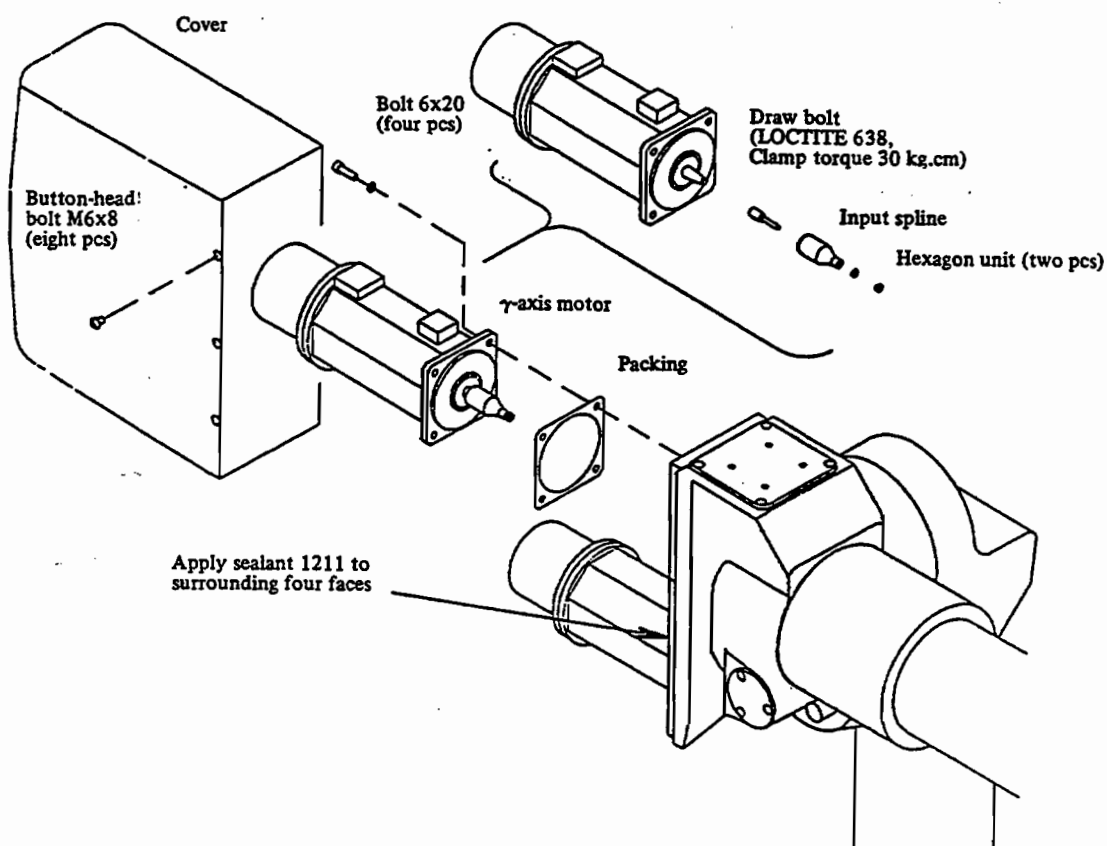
(a) Replacing γ -axis motor (S-10)
